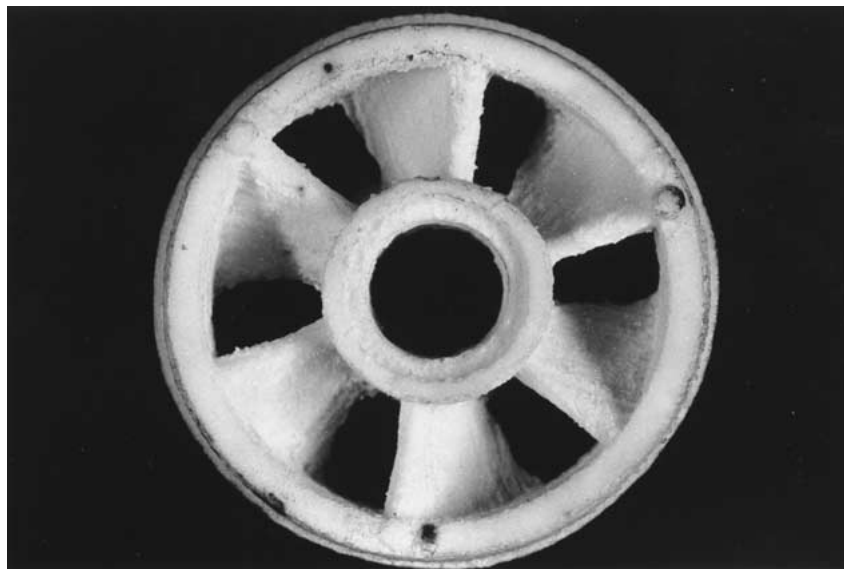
Sintered ceramic impeller, obtained by direct ink-jet printing.
